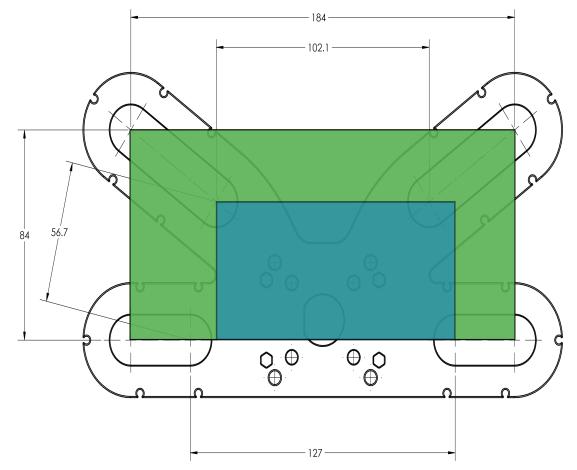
Minimum and maximum arrangement possibilities of the air nodes position.
